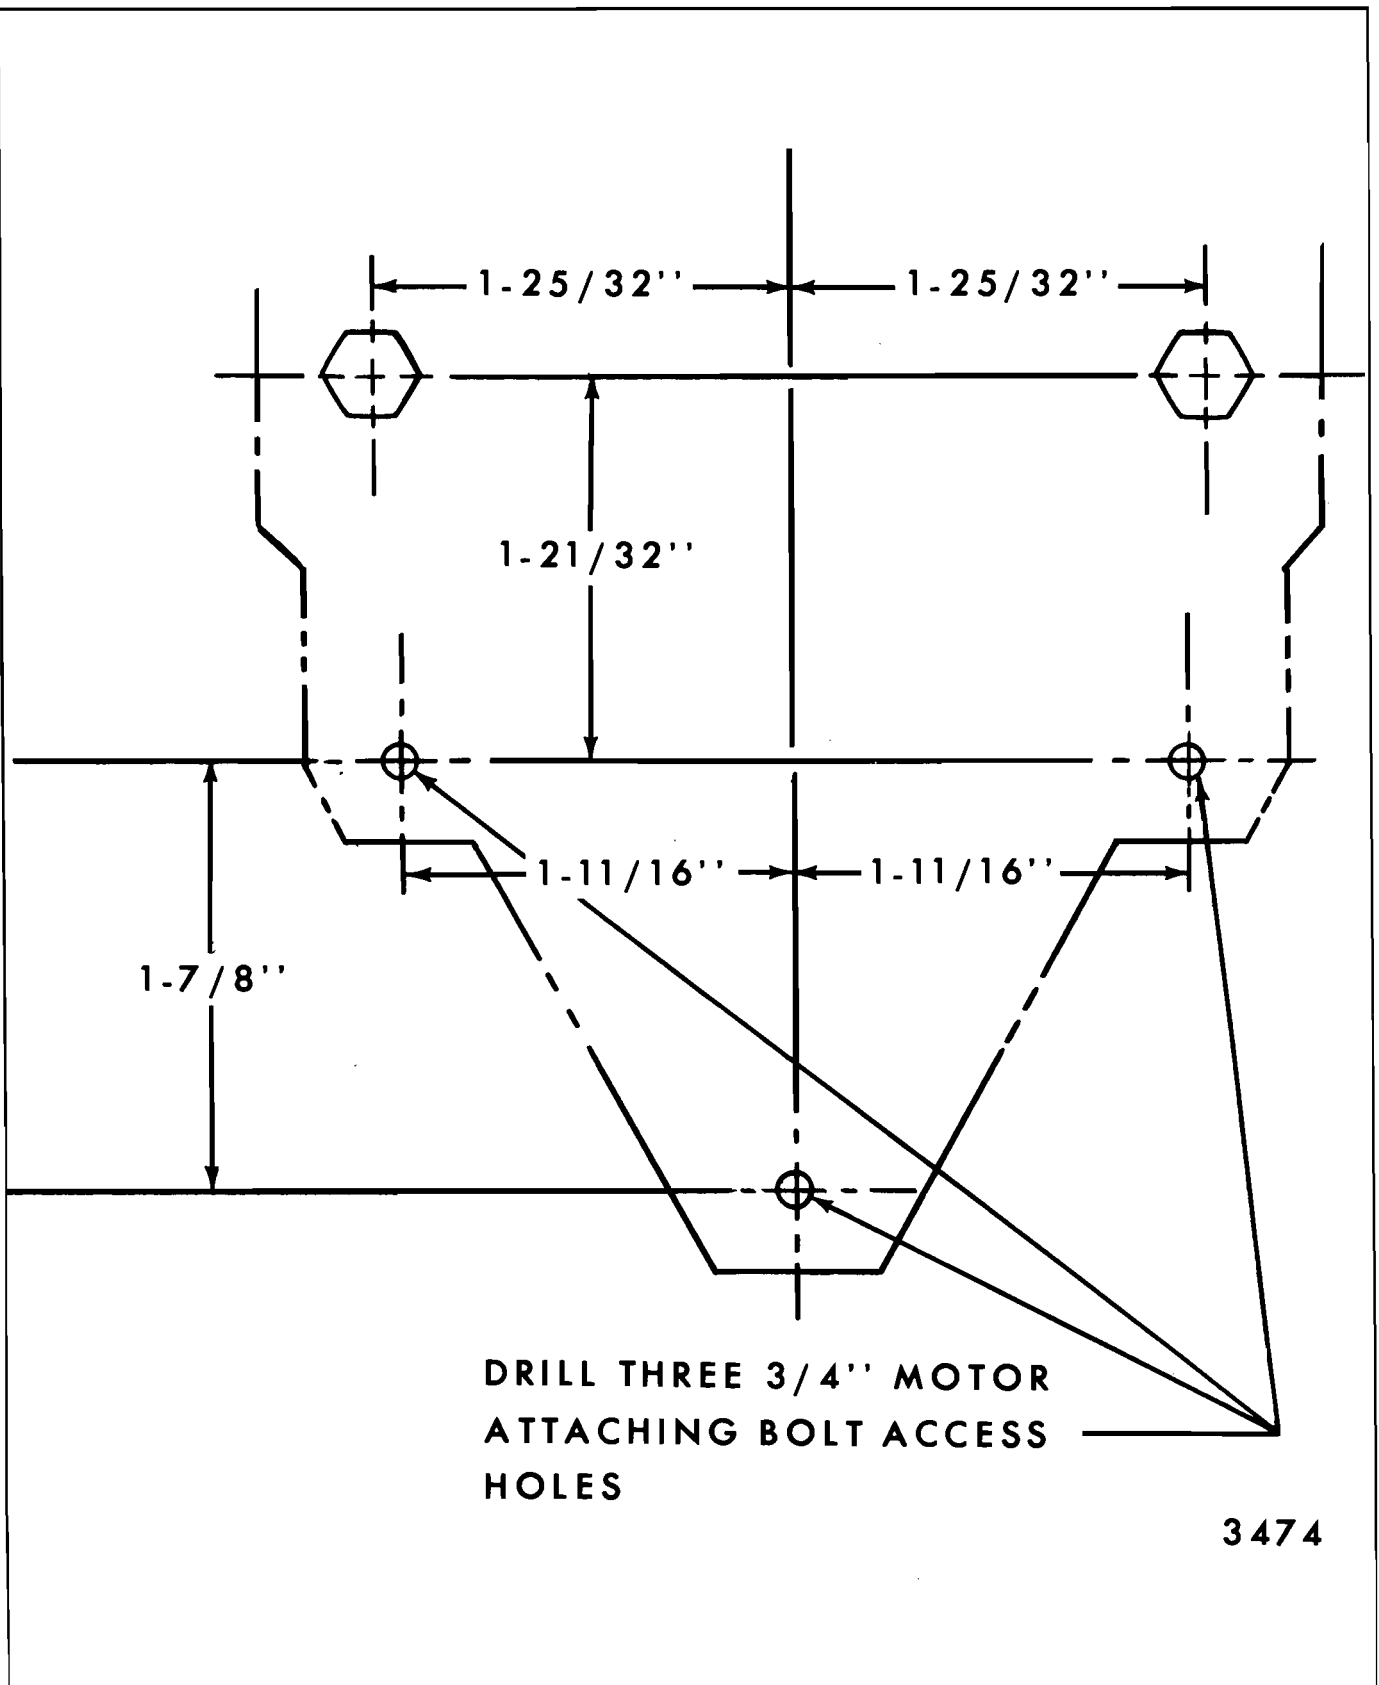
Window Regulator Lower Attaching Bolts (Reference Points for Locating Window Motor to Regulator Attaching Bolts) - "A-27, 37, 77 & 87" and "G-57" Styles
